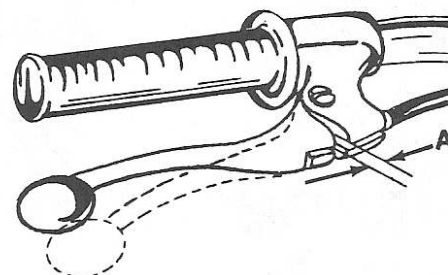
Brake lever free play (A) on Models YT175J and YT175K should be 5-8 mm (0.2-0.3 in.).
